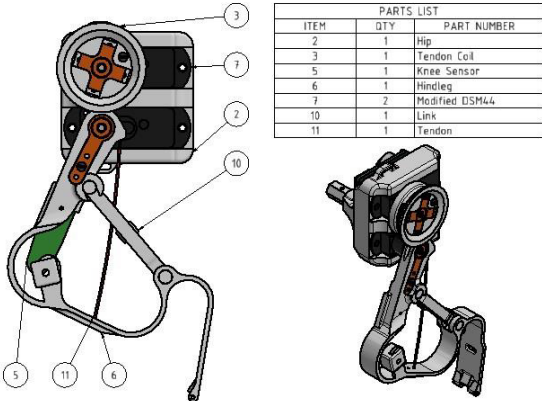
Technical illustration of the left hindleg module with all major components labelled.
